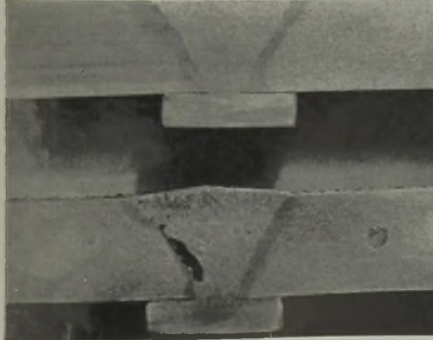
(left) Undercut on fillet weld. (right) Good fillet weld, complete penetration, flat face and no undercut.
